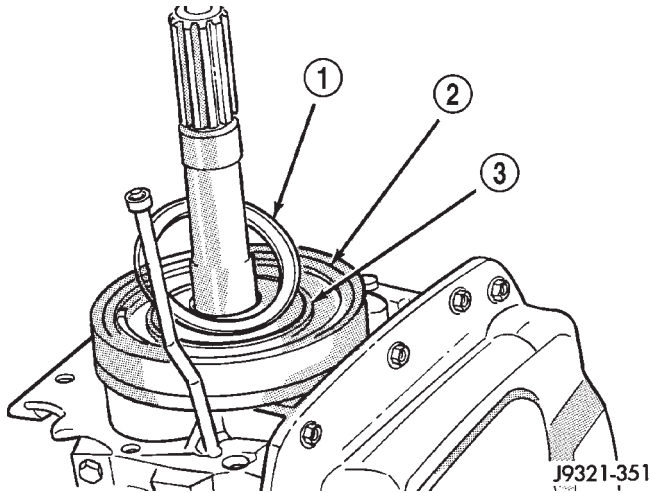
Overdrive Piston Thrust Bearing Removal/ Installation
